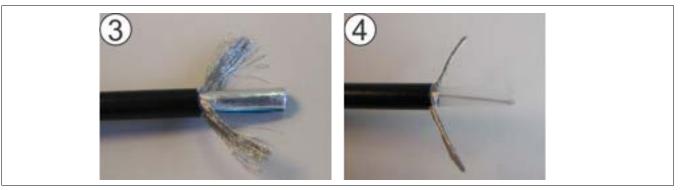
Preparing FlexZone sensor cable steps 3 & 4
